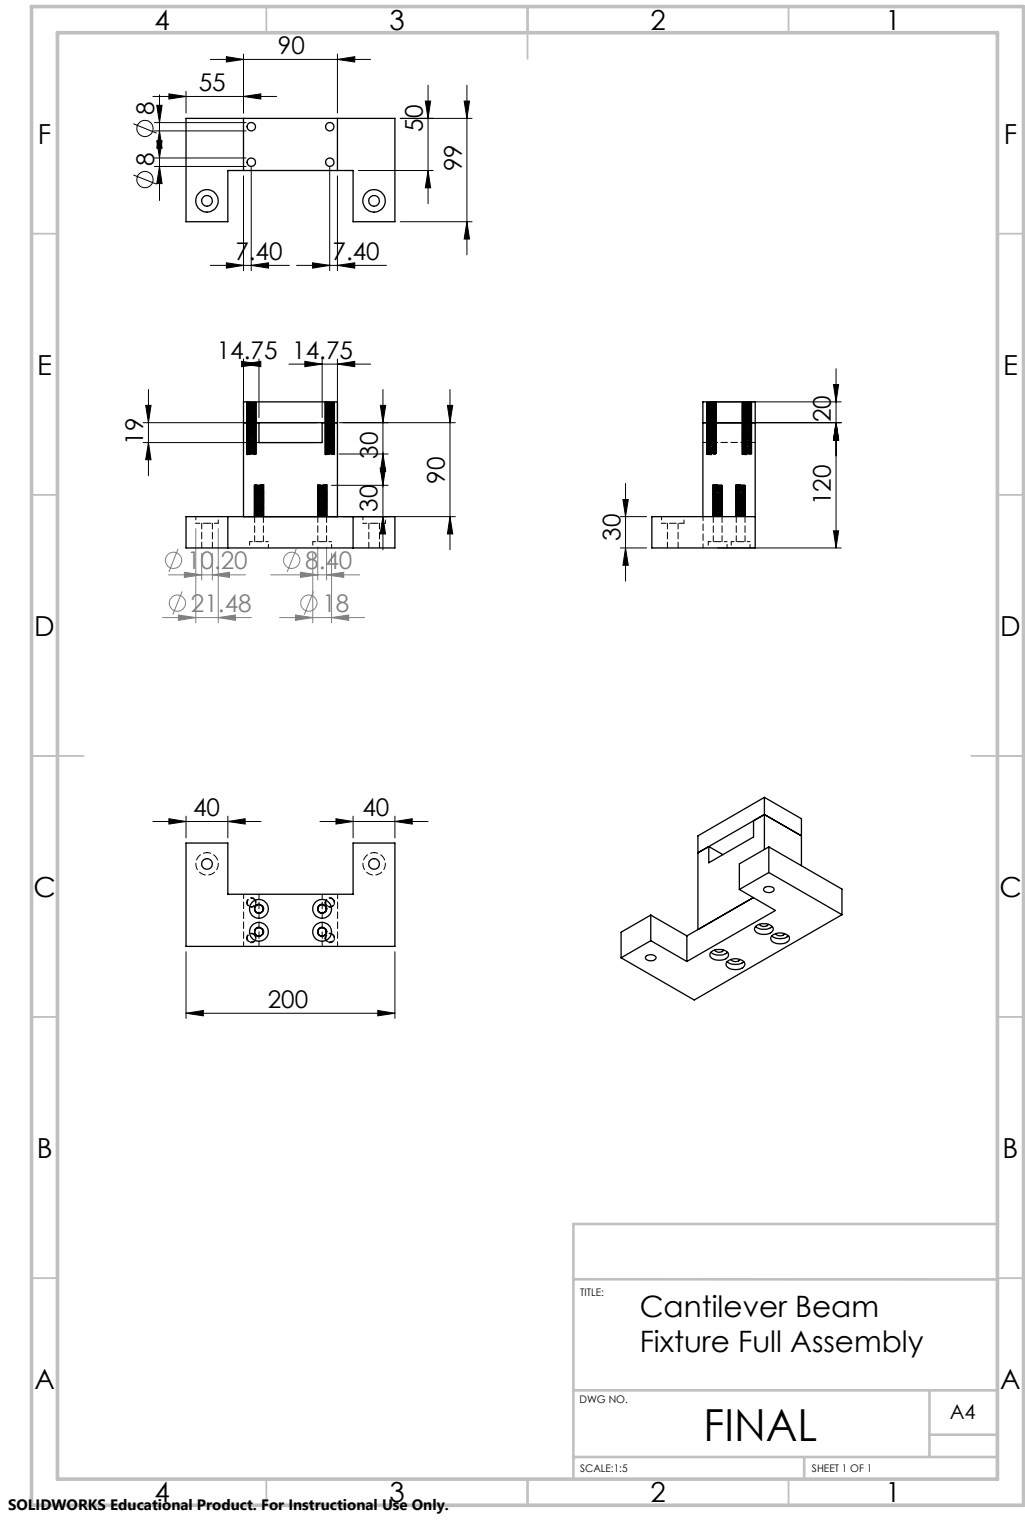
CAD model of the fixture for bending testing adapted from [119].
